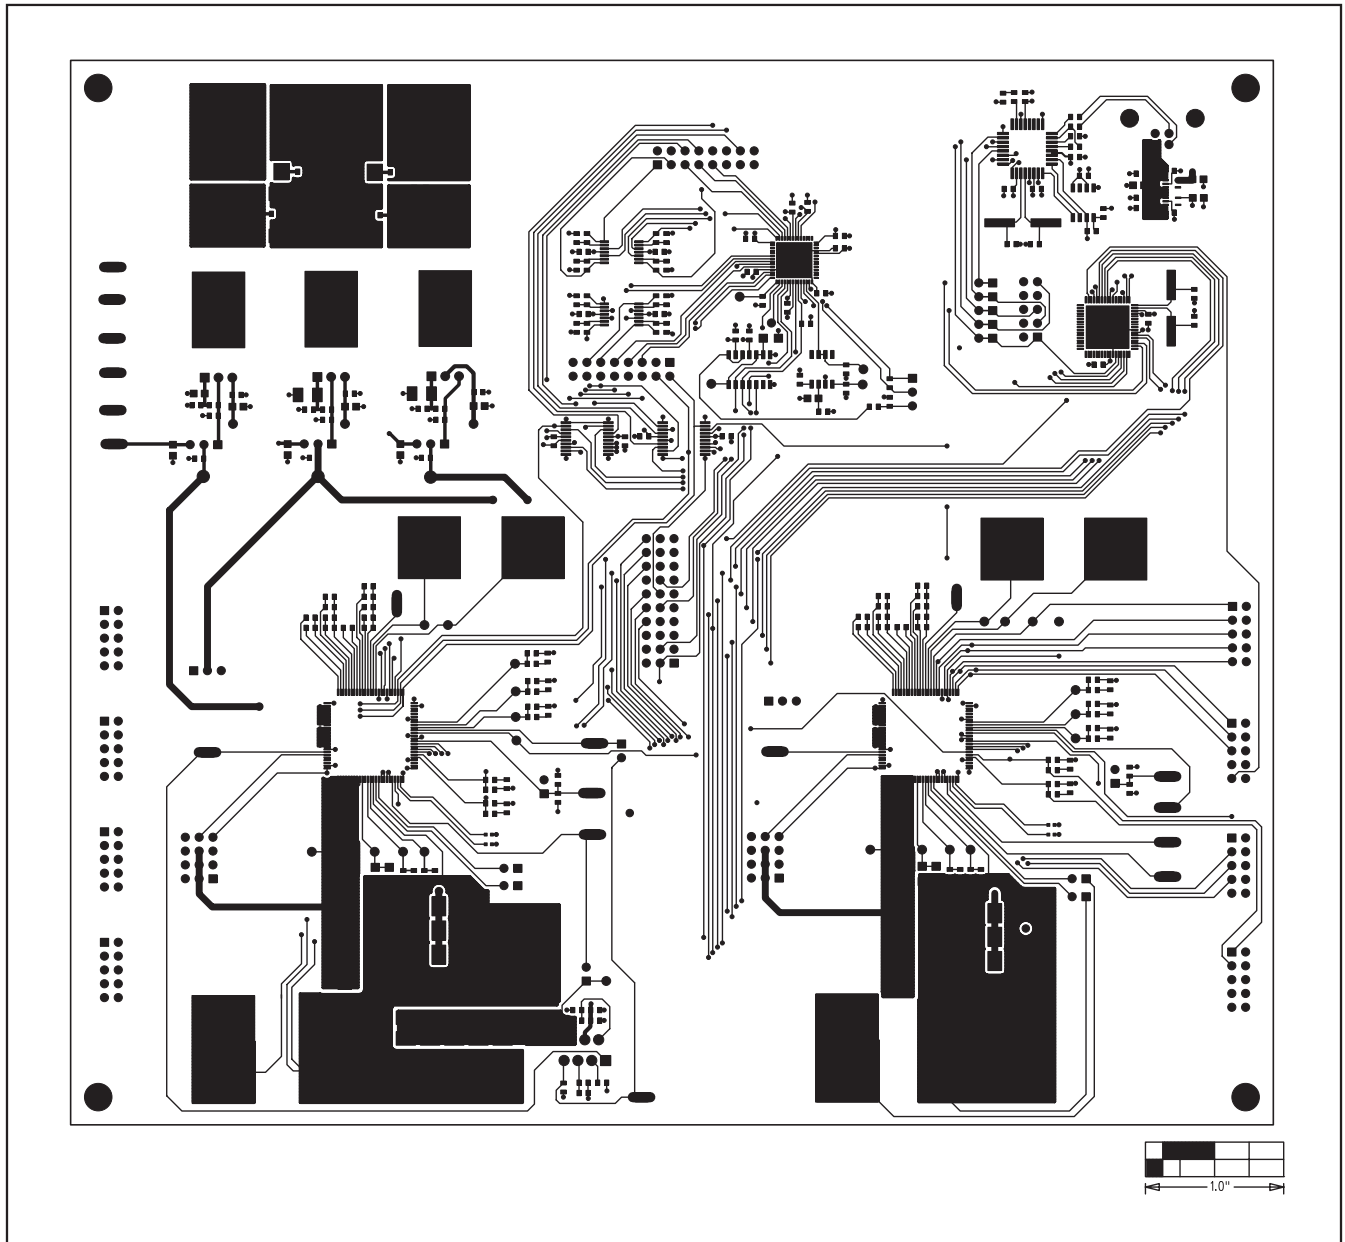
MAX9959 EV Kit PCB Layout—Component Side
